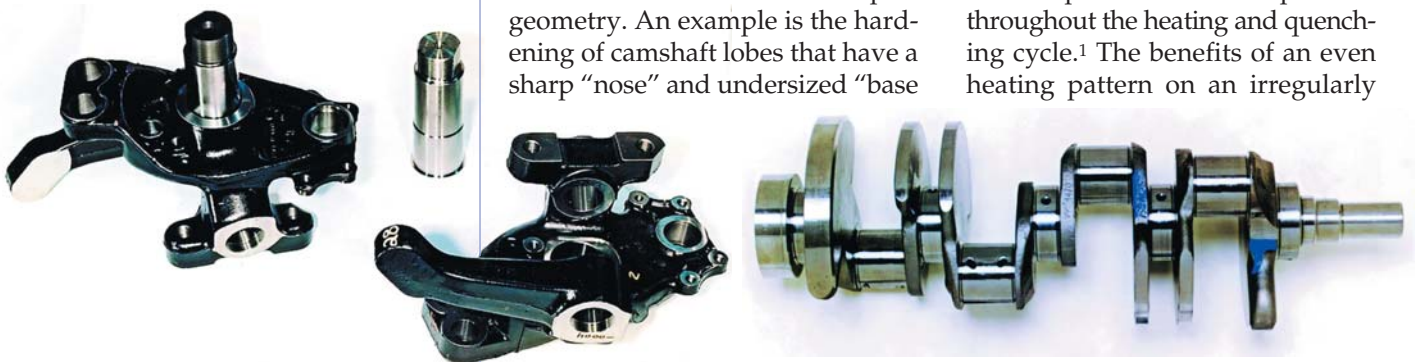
Examples of complex-shaped parts that may require use of clamshell inductors.
